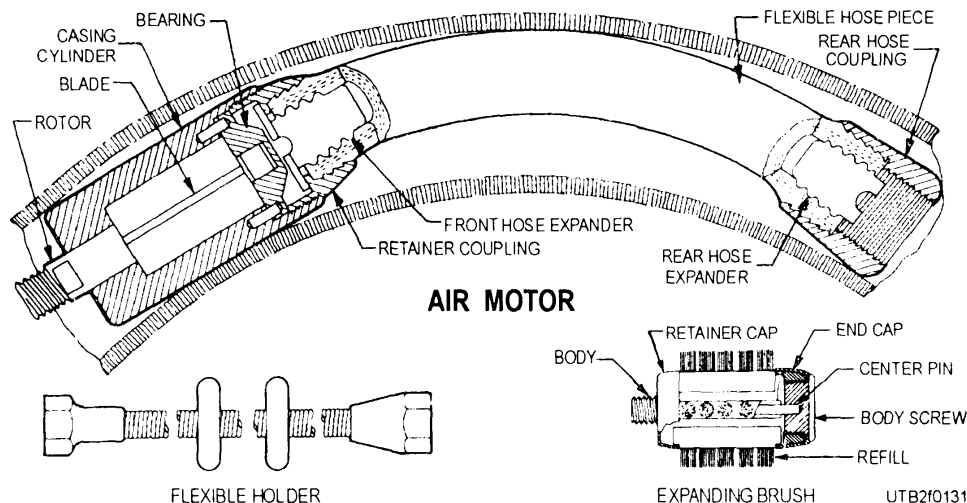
Boiler tube cleaner (pneumatic turbine-driven type).
